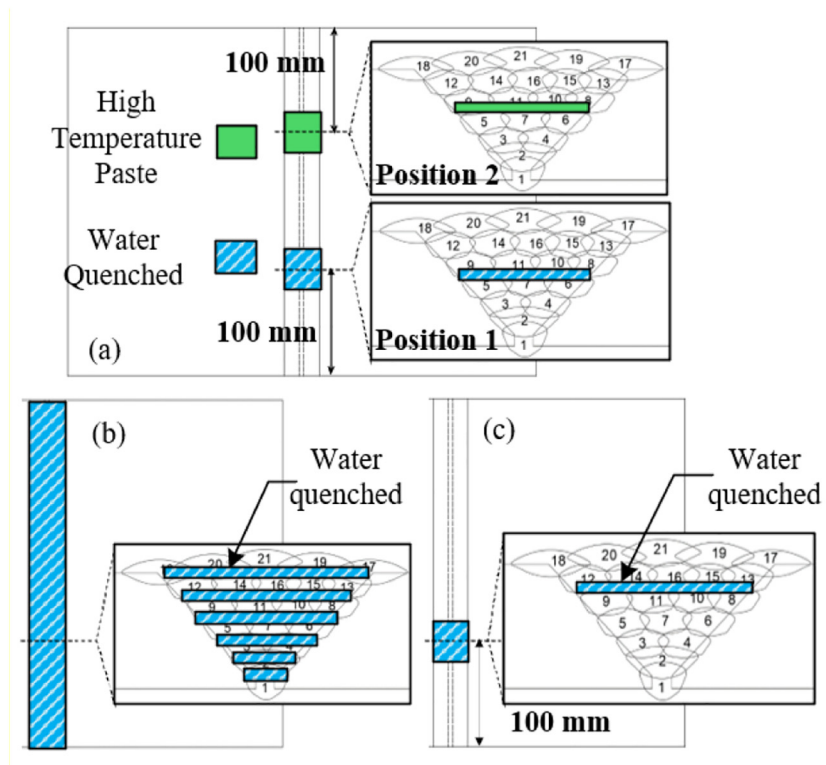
The location and types of defects introduced to the weld during the process for samples (a) Q1, (b) Q2, and (c) Q3.
